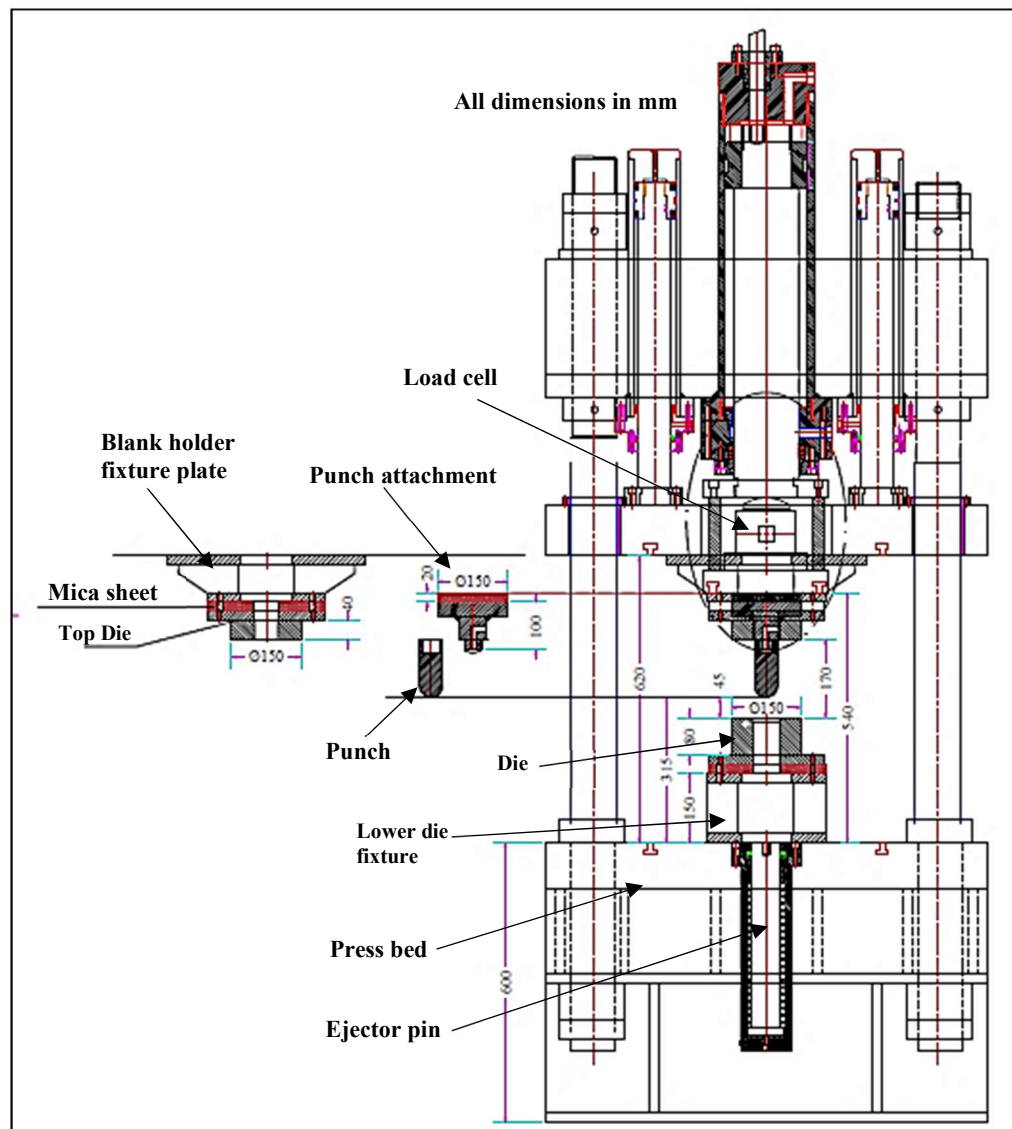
CAD assembly of hydraulic press with the designed tools (all dimensions in mm)
